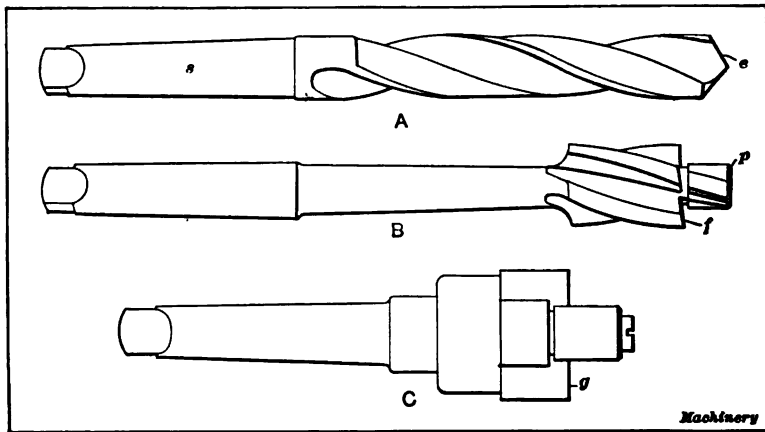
(A) Twist Drill. (B) Solid Counterbore. (C) Counterbore with Inserted Blade
